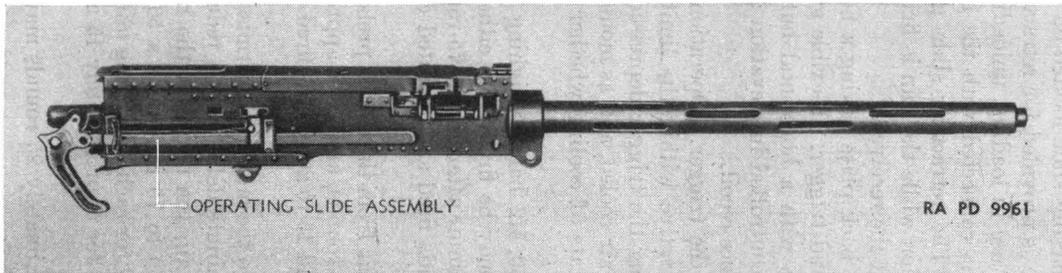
Browning machine gun, caliber .50, M2, aircraft, fixed—right side view.
